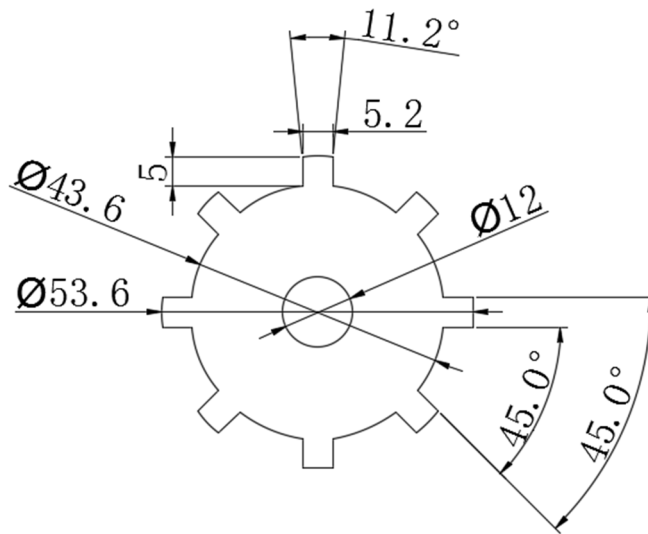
8-pole rotor dimensions for 6/8 FRPM machine.
